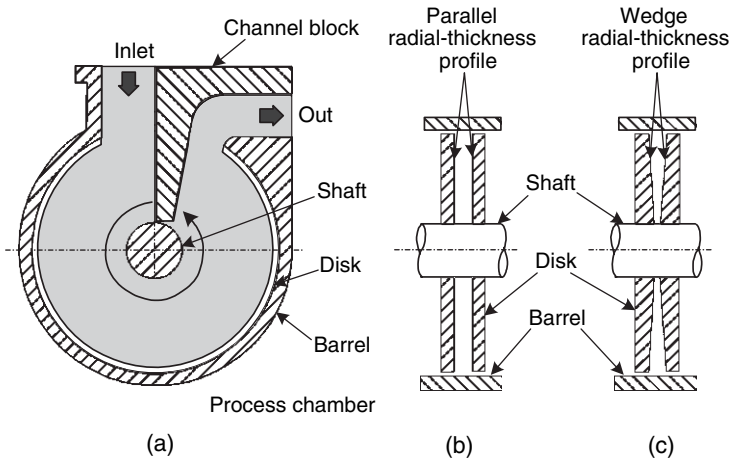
(a) Schematic view of a co-rotating disk configuration. The disks are attached to the rotating shaft and enclosed in a housing. The channel block separates between inlet and outlet. (b) Parallel disk geometry and (c) wedge-shaped disk geometry.
